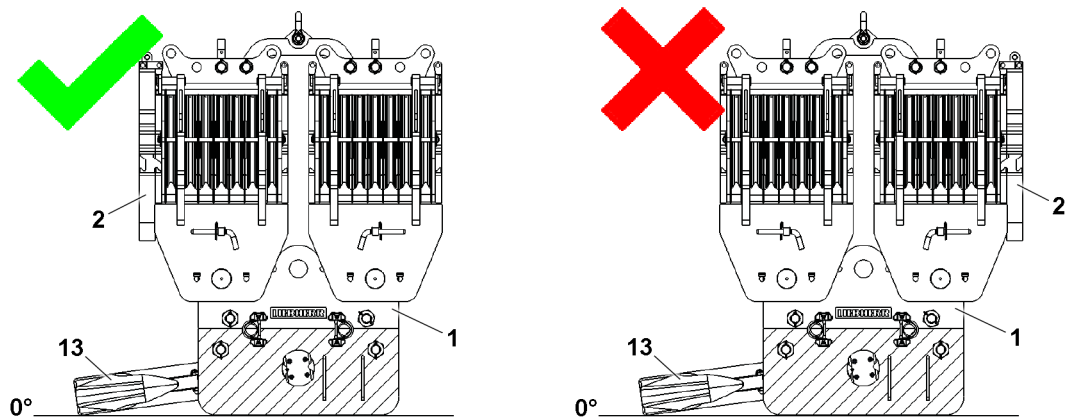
Observe the location of the hook during assembly or disassembly of the auxiliary weights
